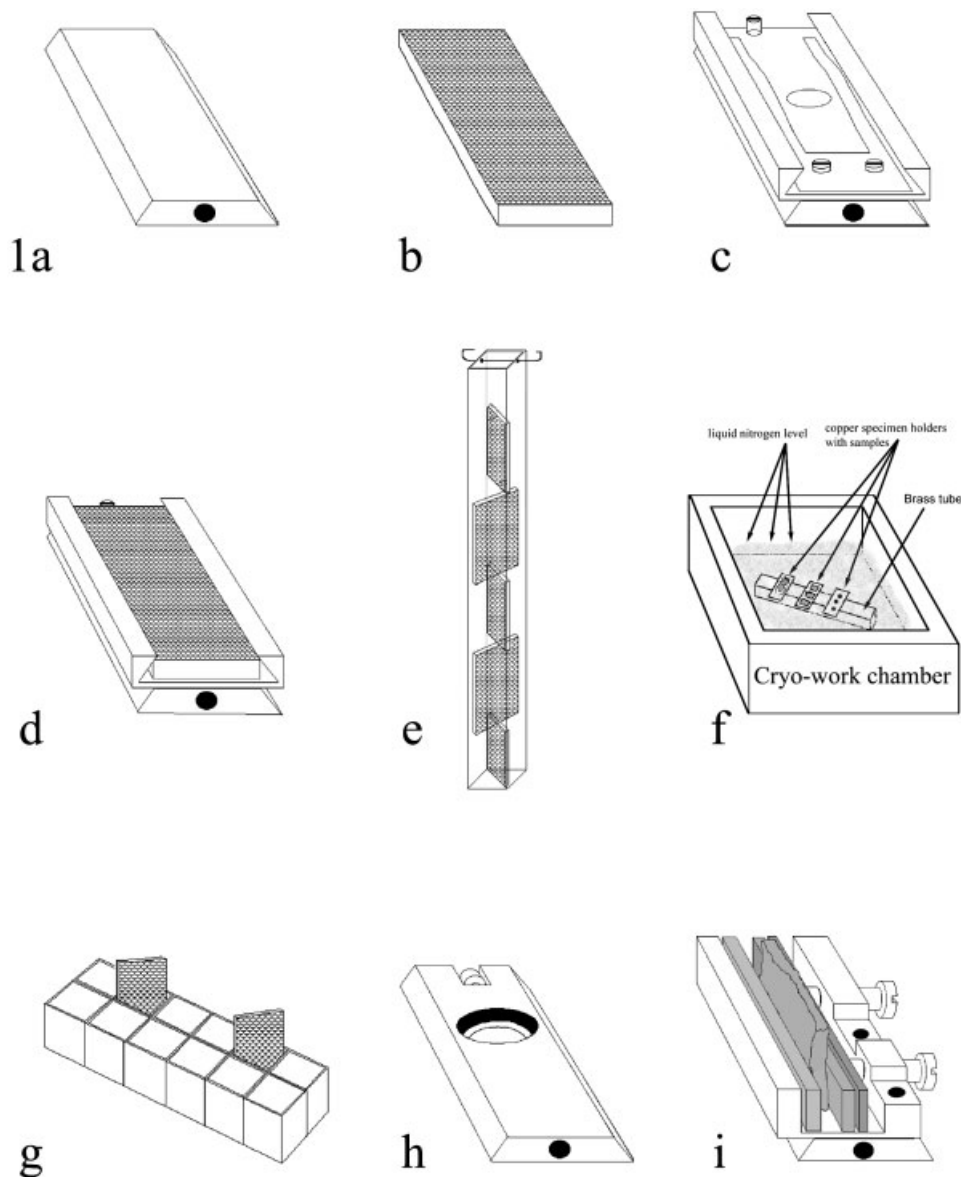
Drawings of devices that were fabricated in the author's laboratory. a: Drawing of the standard specimen holder that is supplied with the Oxford CT 1500 HF Cryo-system. The rod of the specimen transfer device screws into the holder (black hole) and enables the specimen to be moved through the pre-chamber to the cold stage in the SEM. b: Drawing of a sampling plate,  $15 \times 29$  mm, that is cut from stock sheet of copper, 1.5 mm thick. One surface of the plate is numbered for identification purposes; the opposite surface (shown in the diagram) is roughened to enhance adhesion of the frozen specimen. c: Drawing of a modified specimen carrier that is fabricated and attached to the standard specimen holder (lower level) depicted in a. d: Drawing of the modified specimen carrier containing the sampling plate depicted in b. The entire assembly, which attaches to the transfer rod of the cryo-system, can then be moved through the pre-chamber and onto the cold stage in the SEM. e: Drawing of the square brass tubing,  $13 \times 13$  mm ID. The bottom end is permanently capped; two holes are drilled in the opposing sides of the upper end. Four plates can be inserted diagonally into the tubes; each plate is alternated at  $90^\circ$ . A paper clip inserted through the holes retains the
